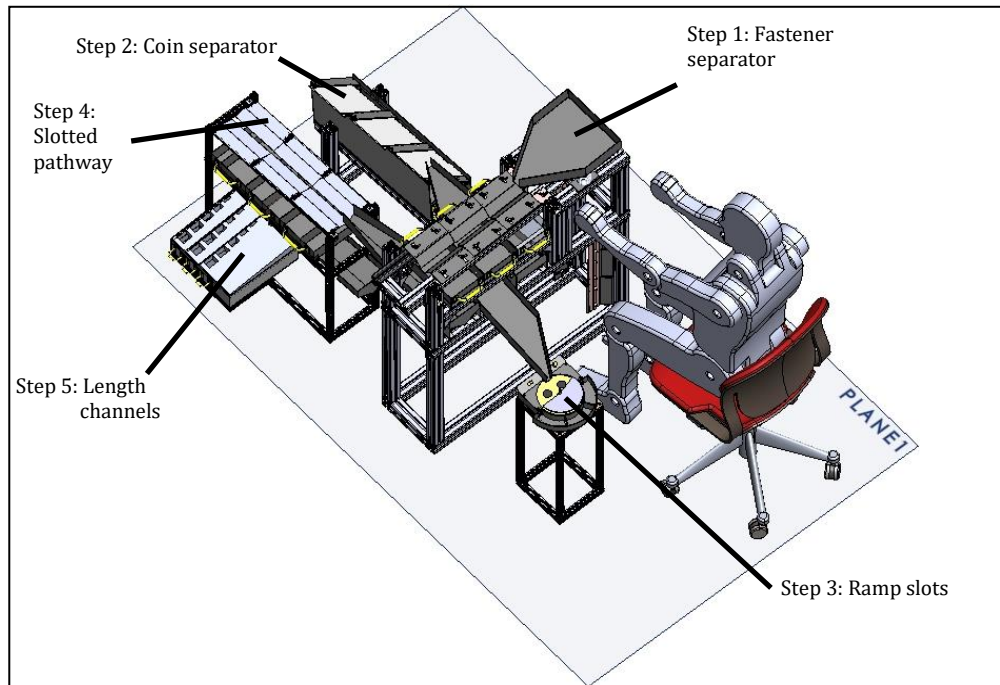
Full assembly of Automated Fasteners Sorting Machine.
